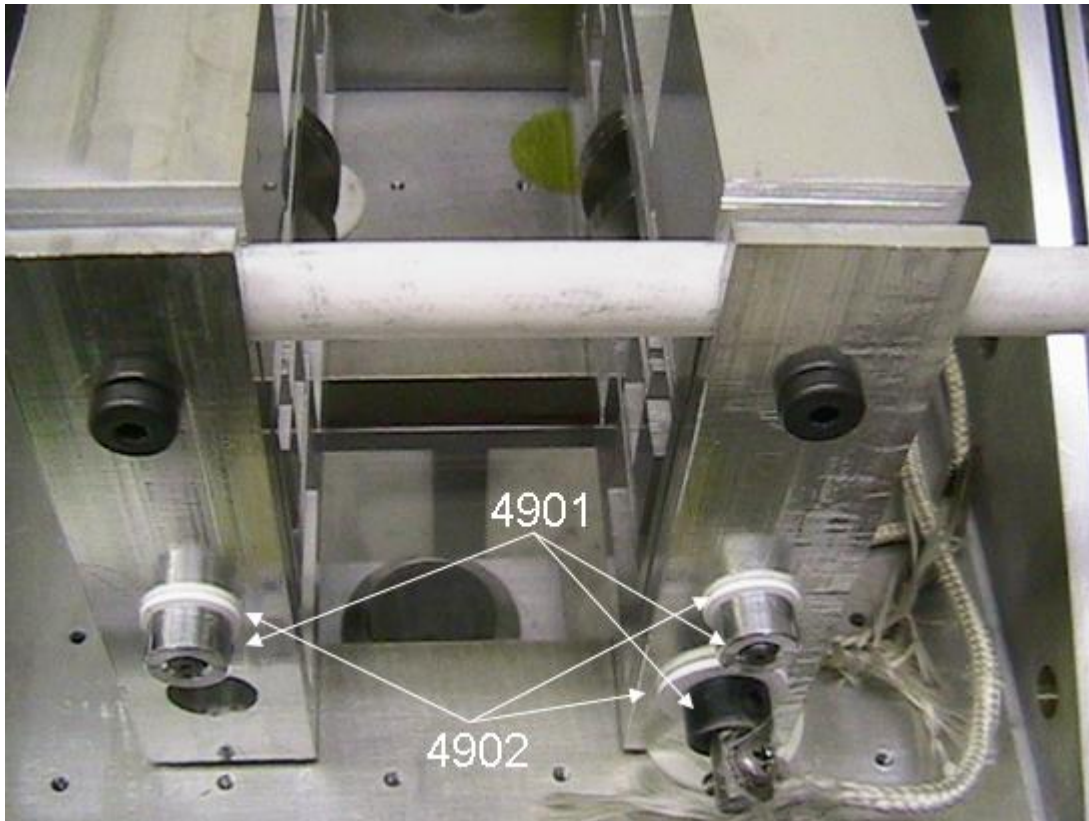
Picture of roller assembly with shaft collars and Macor washers
